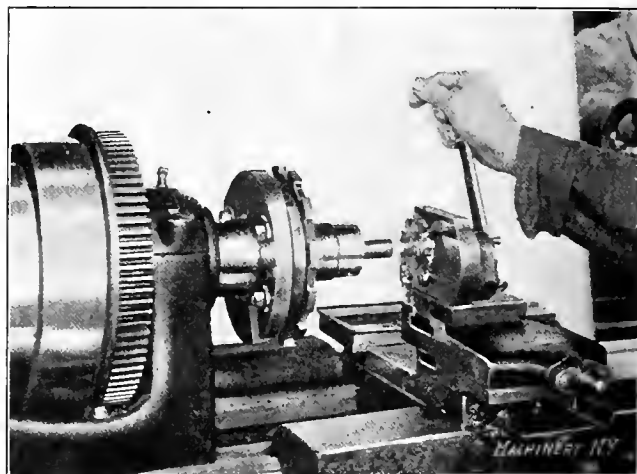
Threading the Gear Case Covers with a Rivett-Dock Threading Tool
